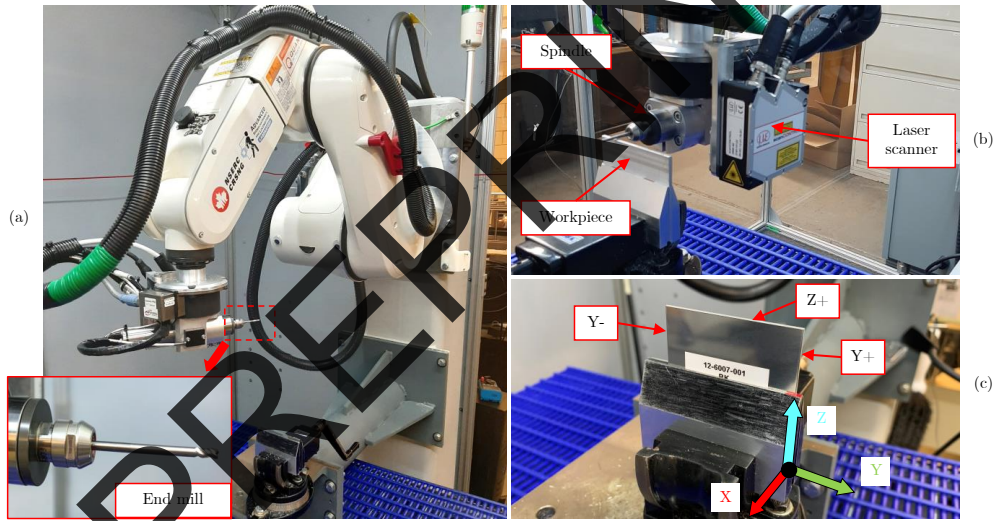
Experimental setup, including (a) the robotic system and end mill, (b) key components, and (c) workpiece with labeled edges.
